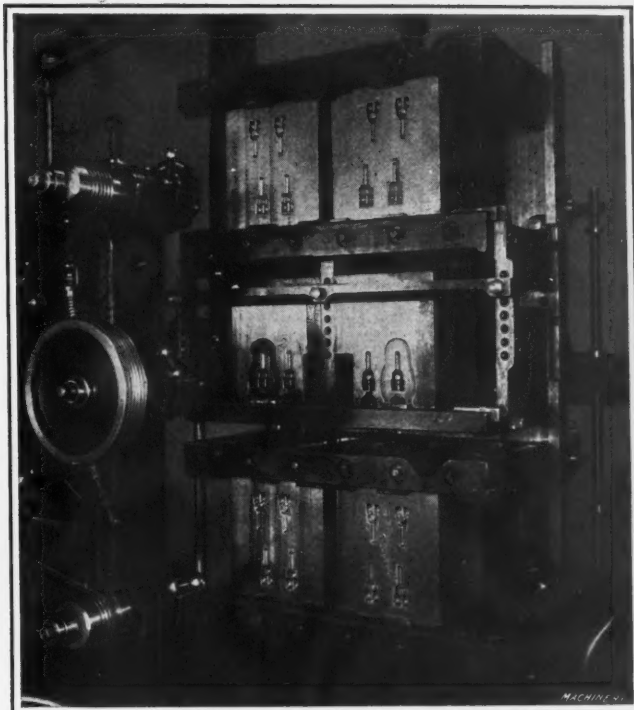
Three-spindle Automatic Profiling and Die-sinking Machine built by the Keller Mechanical Engraving Co.
